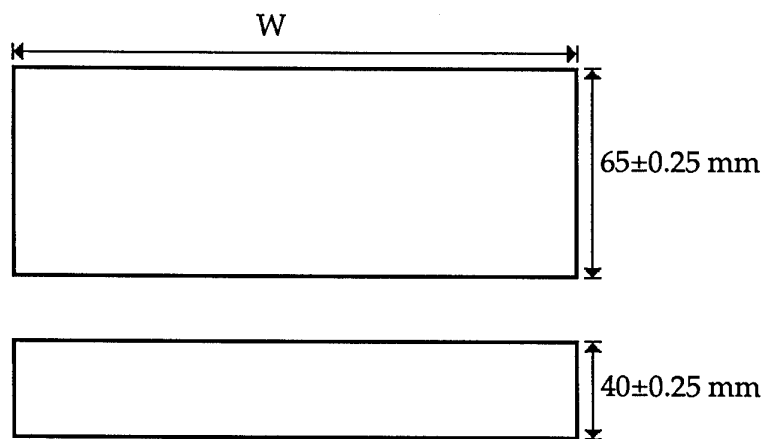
Dimensions for copper foil sheets. W = width as supplied (≈ 150 mm).
